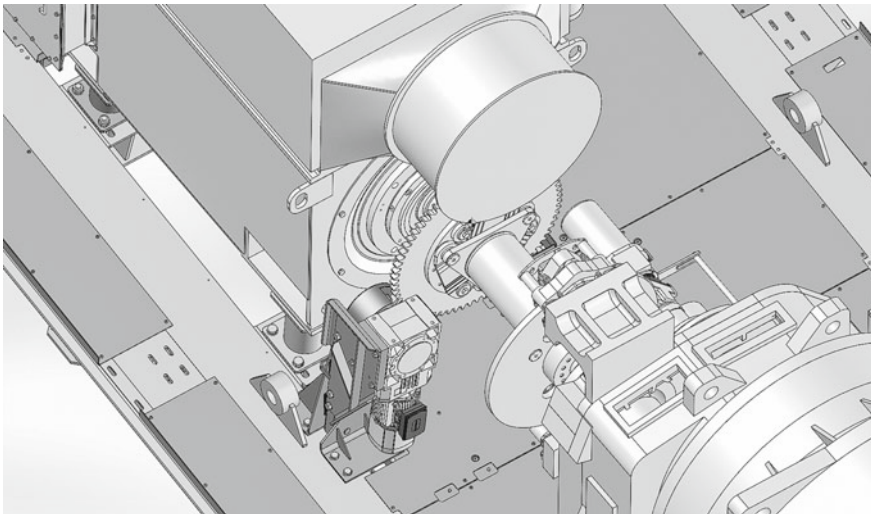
Drivetrain with rotor turning device [aerodyn]
